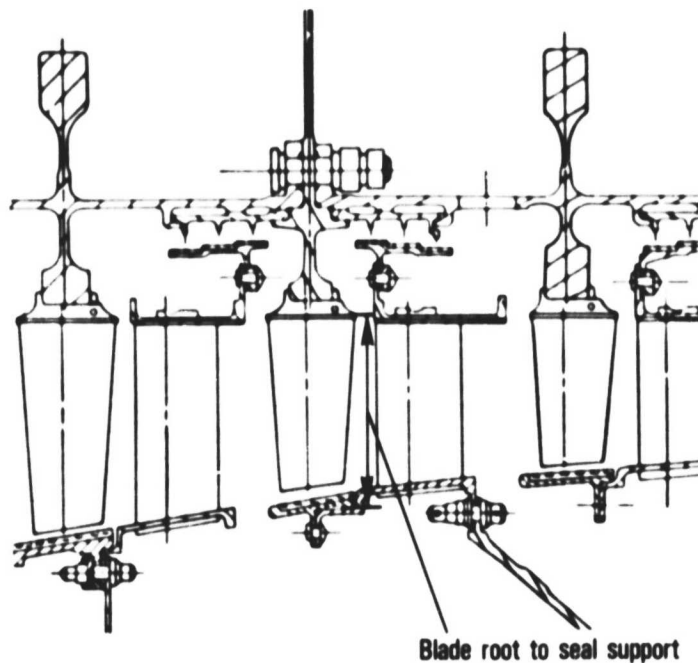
High-Pressure Compressor X-ray Locations - 9th Outer Air Seal. (J23499-1)
